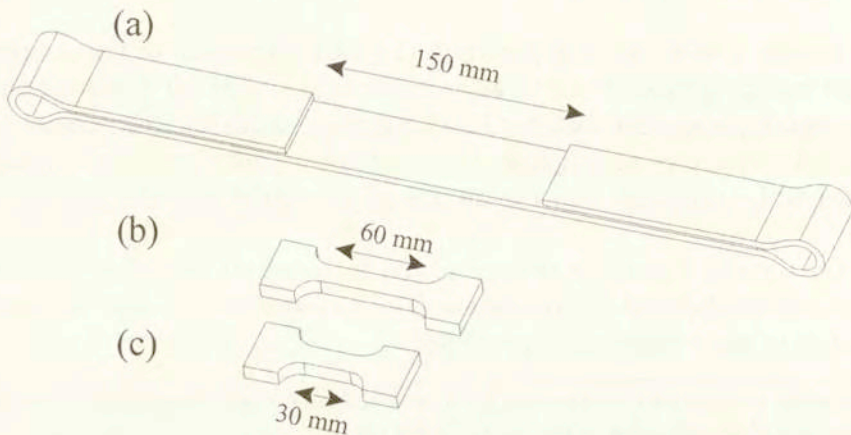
Sketches of the fabric sample (a) and of the machined samples (b) and (c).
